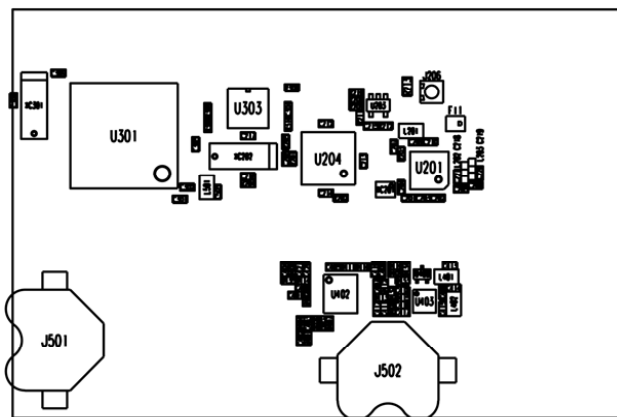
Assembly drawing RZUSBSTICK - front view.
